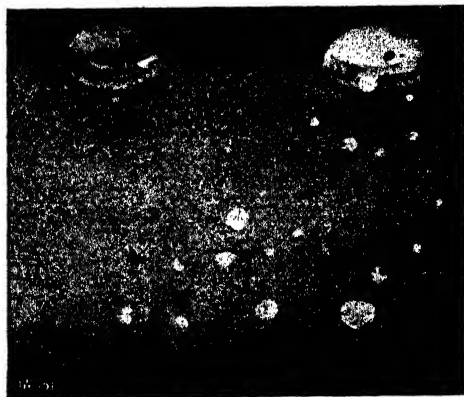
Macro-photograph of an electric built-up weld using steel wire electrodes
